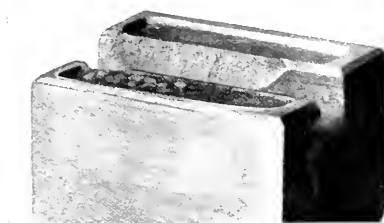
TYPICAL CARBON WEAR AND BREAKAGE FROM HAMMER POUNDING
